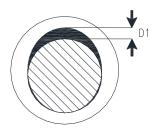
Gap D1 Between Tool D2 and Bushing D3
